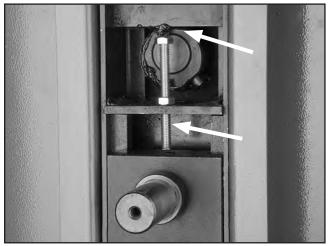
Tension adjustment assembly locations (top wheel removed for clarity).
